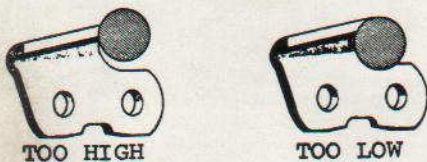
The correct shape of cutter will help chain to cut faster and remain sharp longer. Back slope is caused by file held too high. Hooked edge is caused by file held too low.
